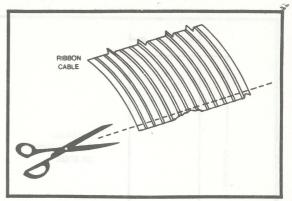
Method used to trim back the ribbon cable to make good contact in the connector.
